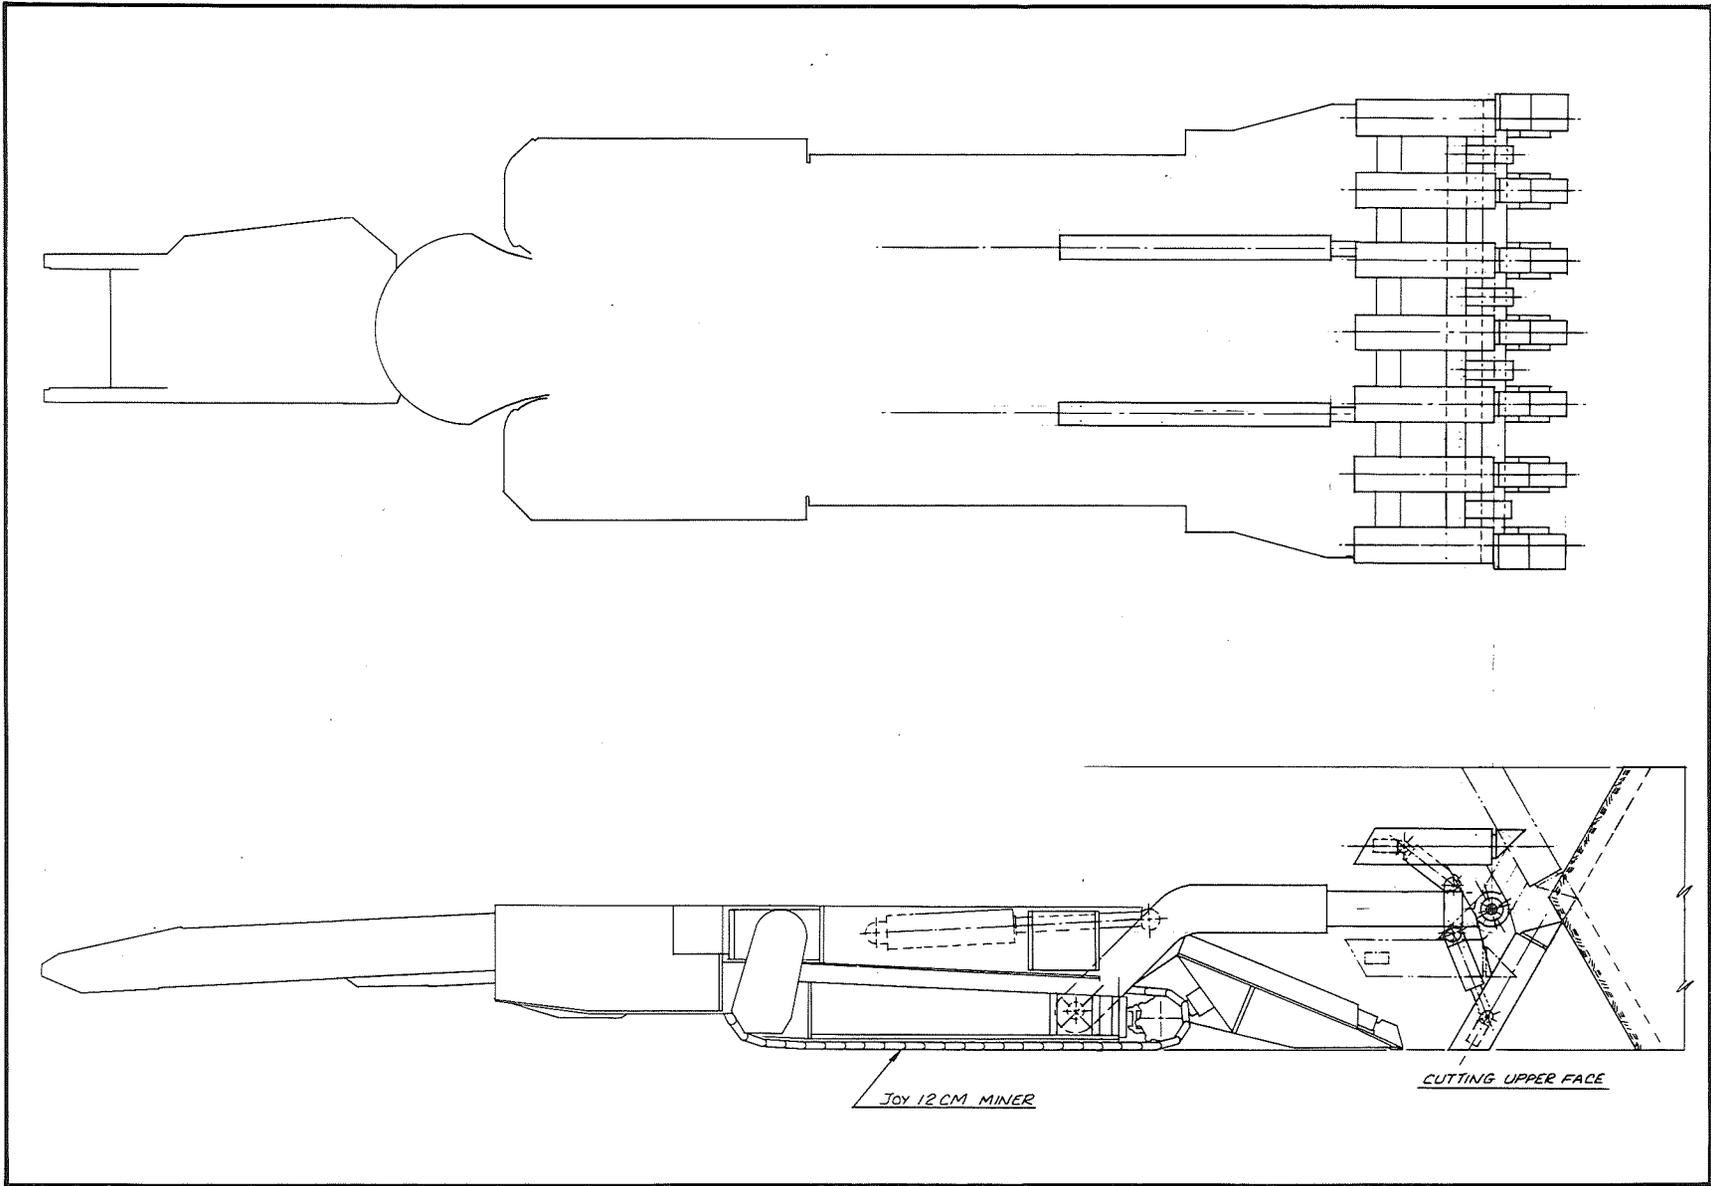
LAYOUT DRAWING, V-FACE CONCEPT
